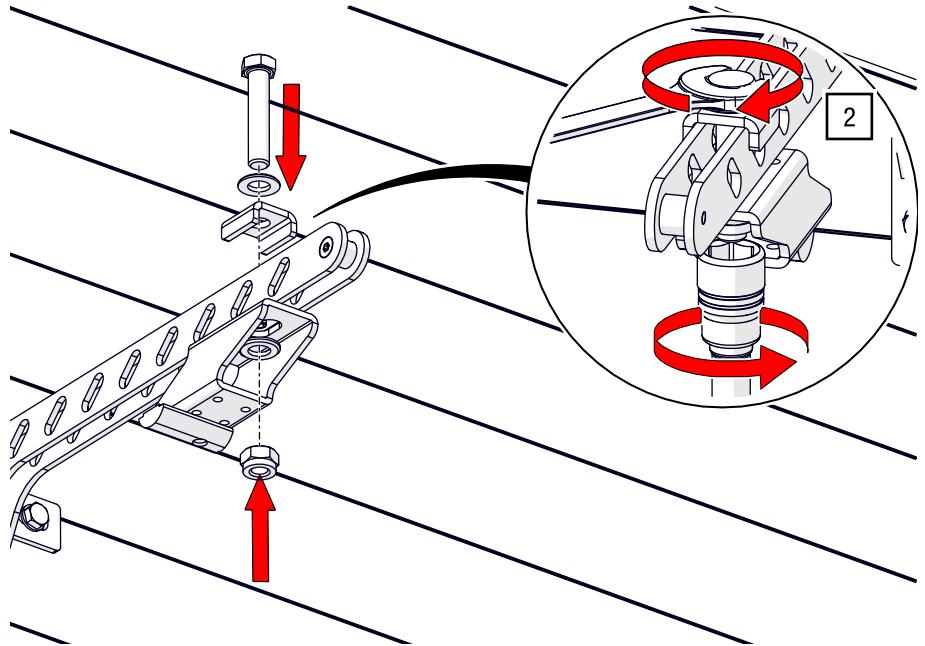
Wall mount bracket – Screw loosely pre-assembled suspension to the wall mount bracket
